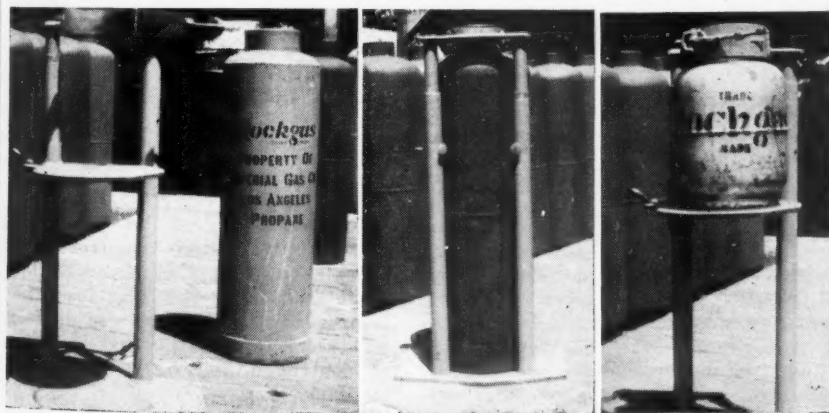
This shows several views of a cylinder holder built by Durwood Hutchinson, Mountain View, Calif. At left is the adjustable sliding plate which holds the bottom of the cylinder. Above it is the emergency brake band holder. In the center is a 11 x 50-in. cylinder firmly secured. At right is a 11 x 17-in. cylinder in proper position for inserting valves.
